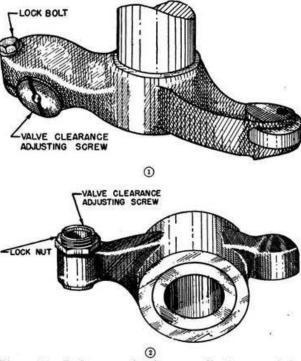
Rocker-arm valve-clearance adjusting-screw locks.
